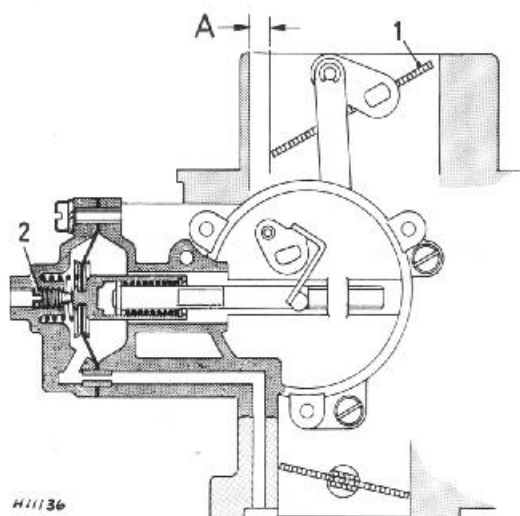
Automatic choke minimum gap setting (DGAS types) (Sec 9)
